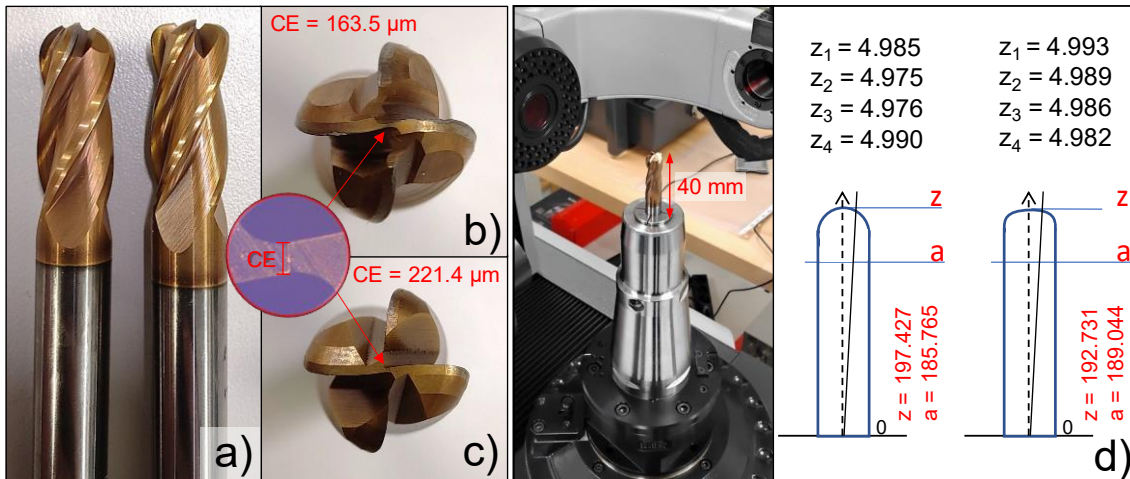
Ball-end tooltips: a) frontal view; b) single radius top view; c) lens shape top view; d) Presetting procedure and cutting edges measures.
